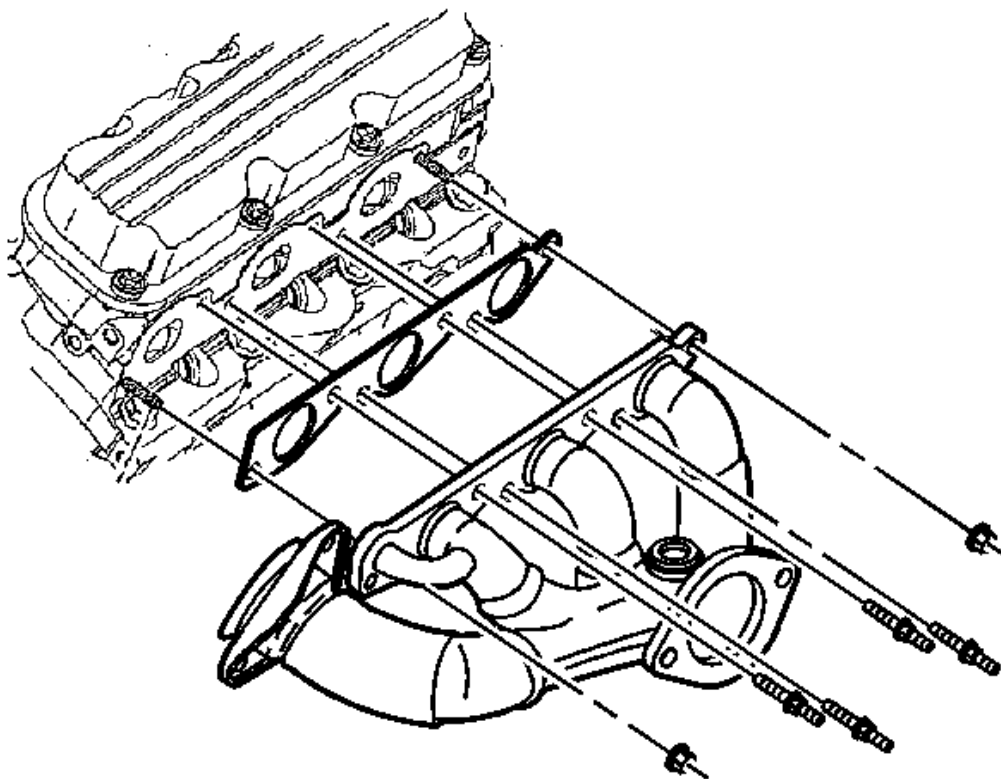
Right Exhaust Manifold (Without A.I.R.)
